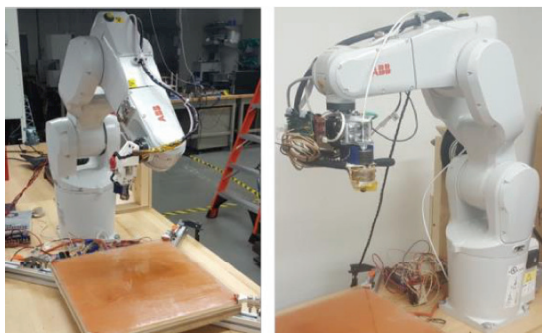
The robot platform used in (left) Sections 2.1 and 2.3 and (right) Section 2.2
